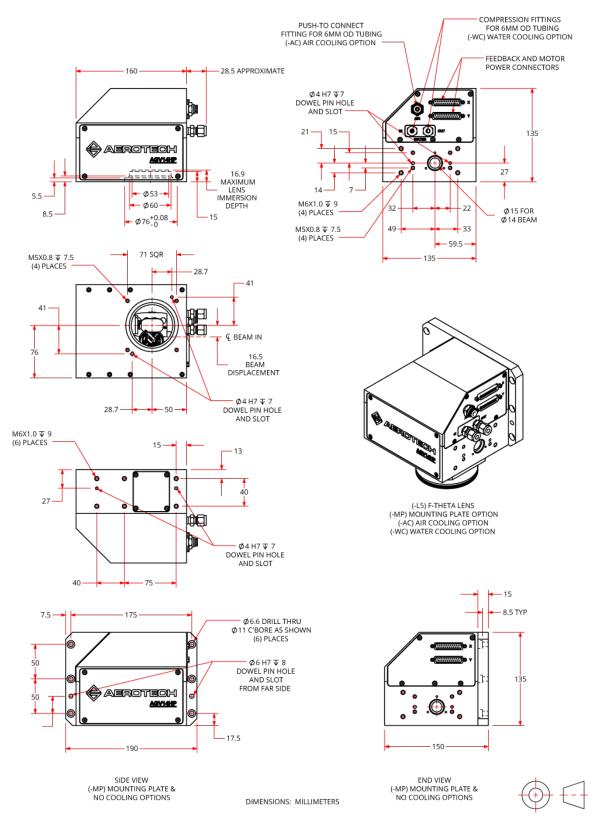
AGV14HP-BE1 Galvanometer Scanner Dimensions
